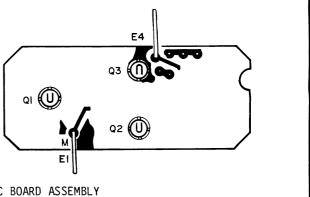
19 1300	MHz	AMP	РС	BOARD	ASSEMBLY
